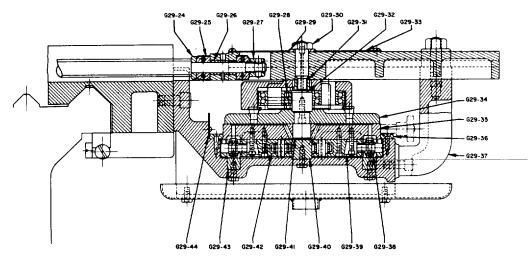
Taper Attachments – Plain and Ball Bearing Sectionals
